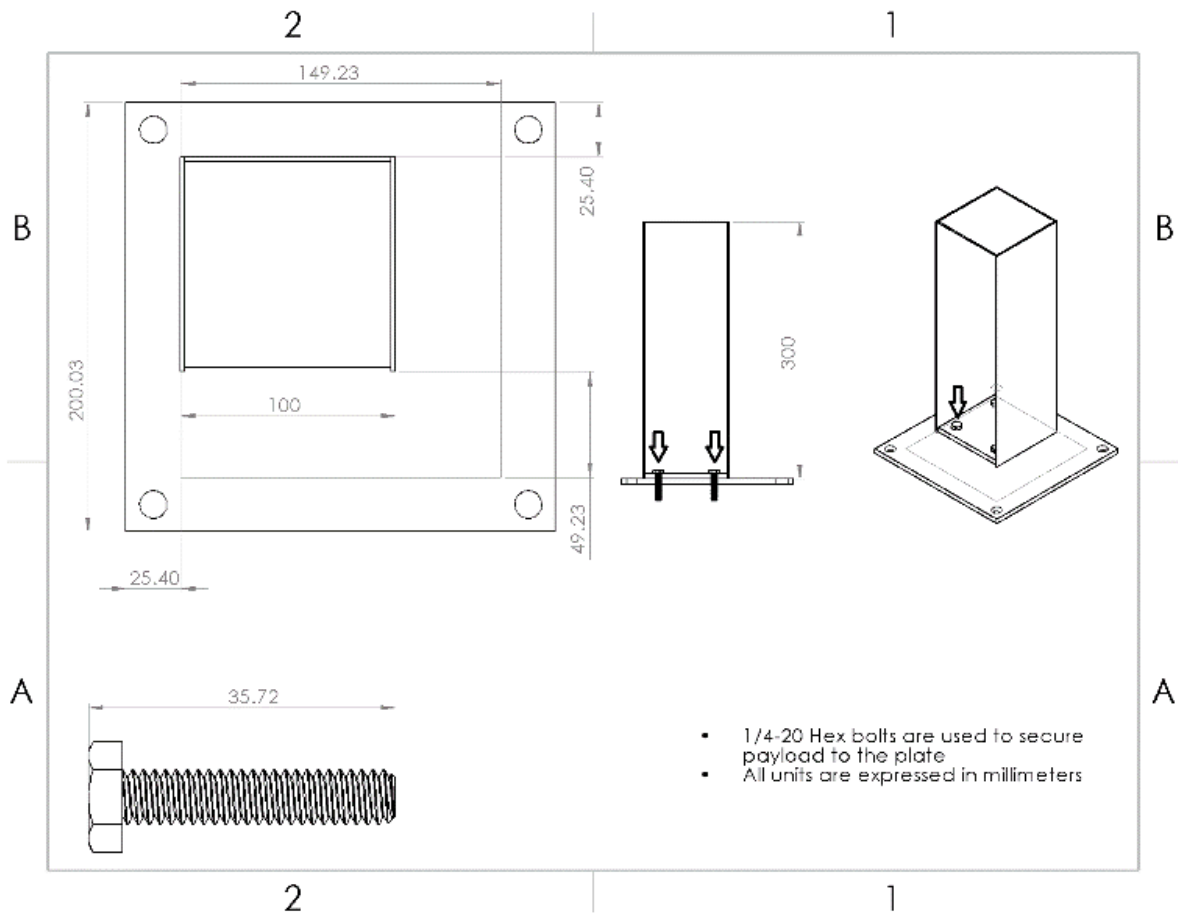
Dimensioned mechanical drawing of HAXDT attached to the HASP mounting plate.
